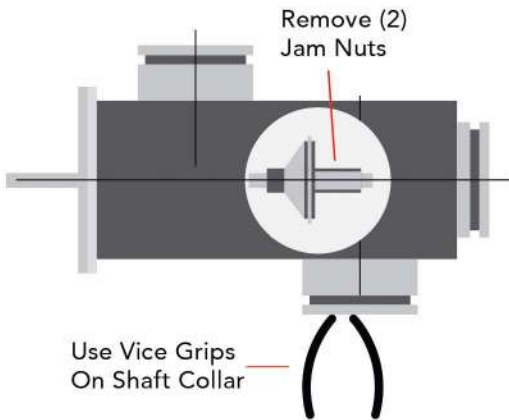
REMOVE BTM VALVE PLATE, SEAL, O-RING & TOP PLATE
